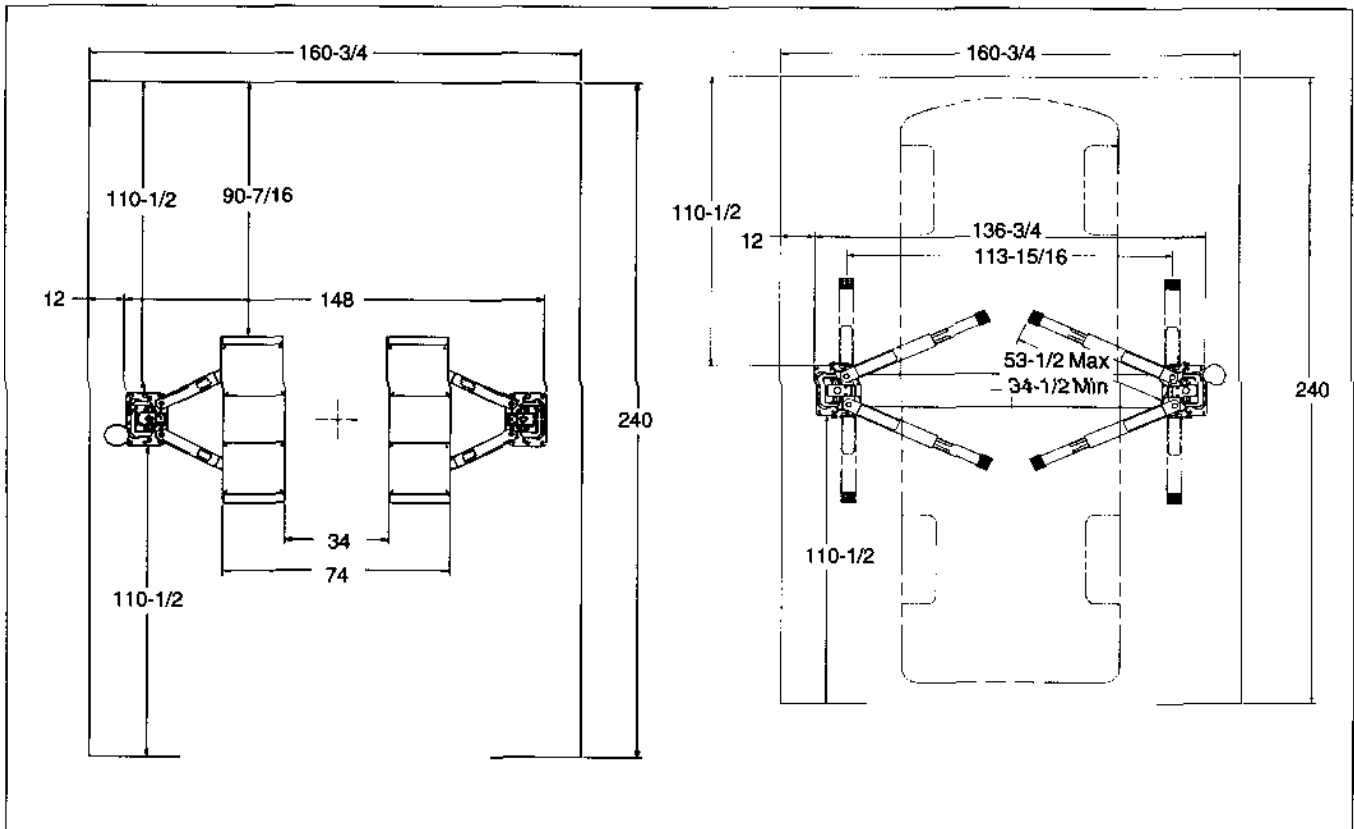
Minimum Floor Space Requirements (Inches) - APO Lifts (left) and AO Lifts (right)
